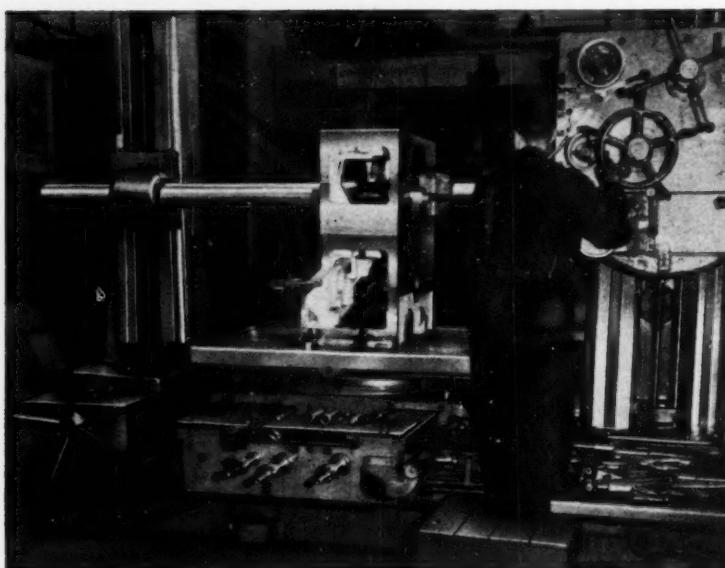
Boring a Drum Housing for a 1-in. Capacity, 6-spindle Automatic on a Collet & Engelhard BFF 115 Horizontal Borer
